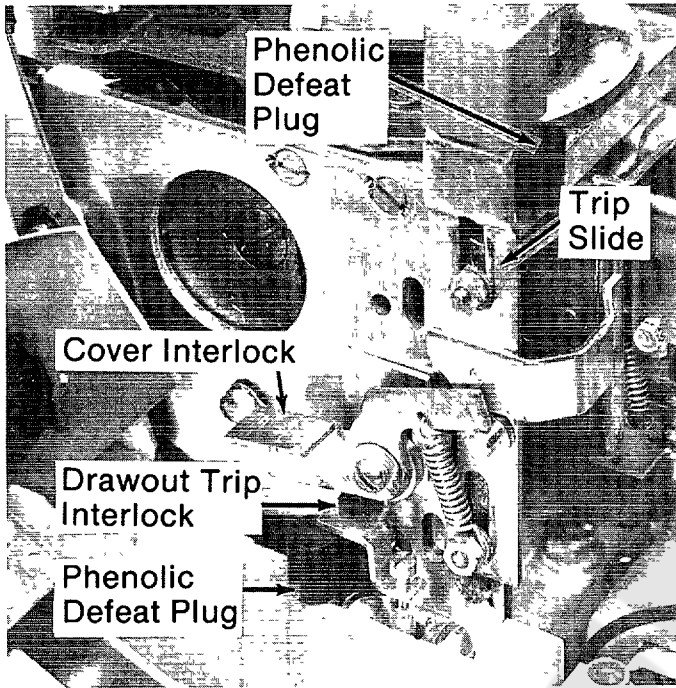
View of breaker with old bell alarm removed and defeat plugs in position.
